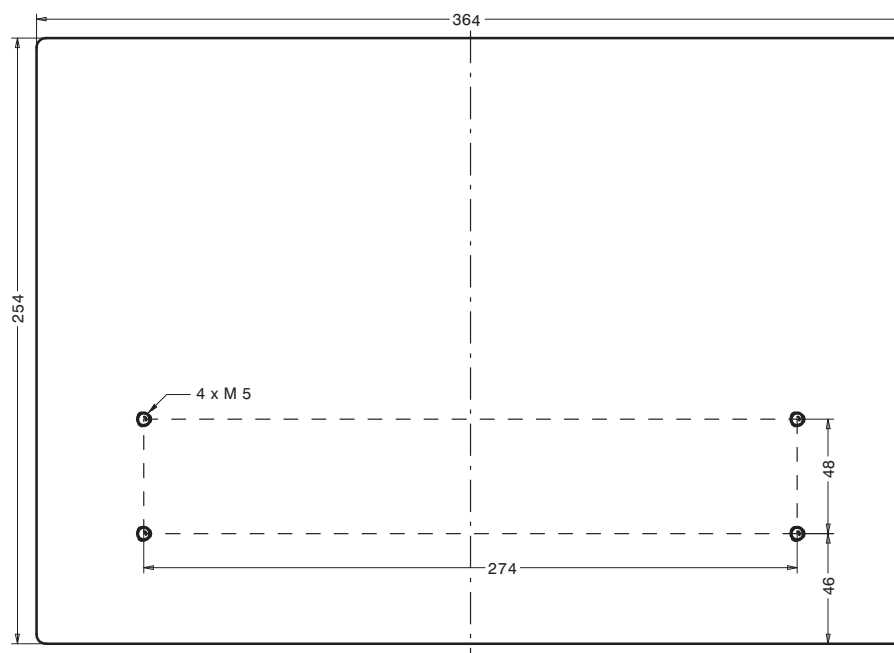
Back, S12 stainless steel enclosure (all dimensions in mm)
